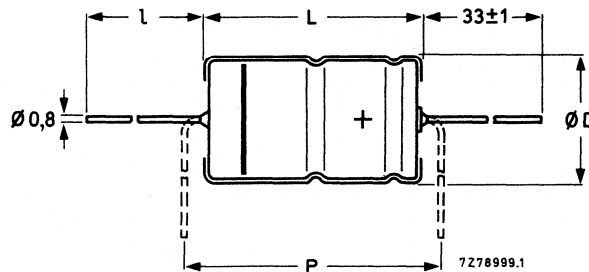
Style 1; see Table 3 for dimensions $\varnothing D$, L , l and P .
